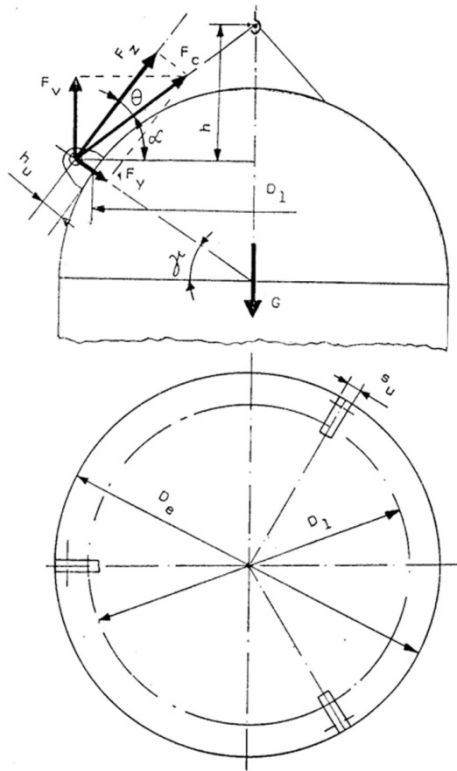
1. Placement of welded flat lugs on a hemispherical cover (sketch)
